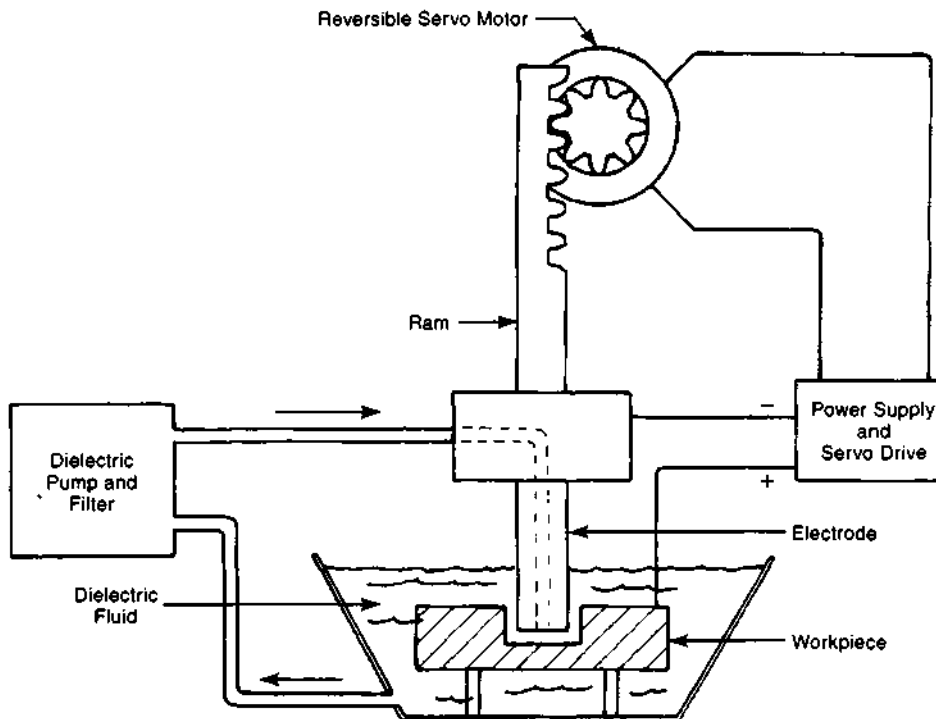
Ram EDM. A series of fine, rapidly repeating electrical sparks from the electrode to the workpiece erode a cavity in the workpiece. The cavity matches the shape of the electrode. (Courtesy American Machinist, Penton Media, Inc.)
